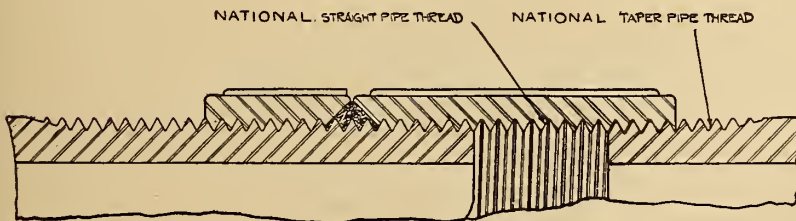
Illustration of "long screw" joint between straight threaded coupling and taper threaded pipe
